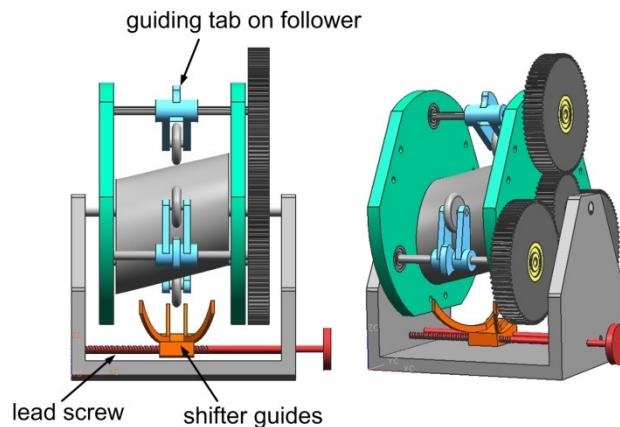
The front and isometric view of a concept transmission showing the shifting mechanism.
